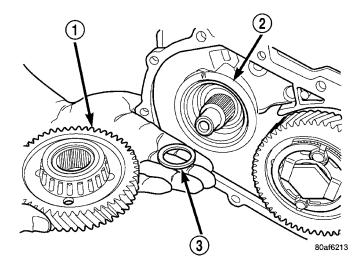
Install Transfer Shaft Gear and (Select) Shim
